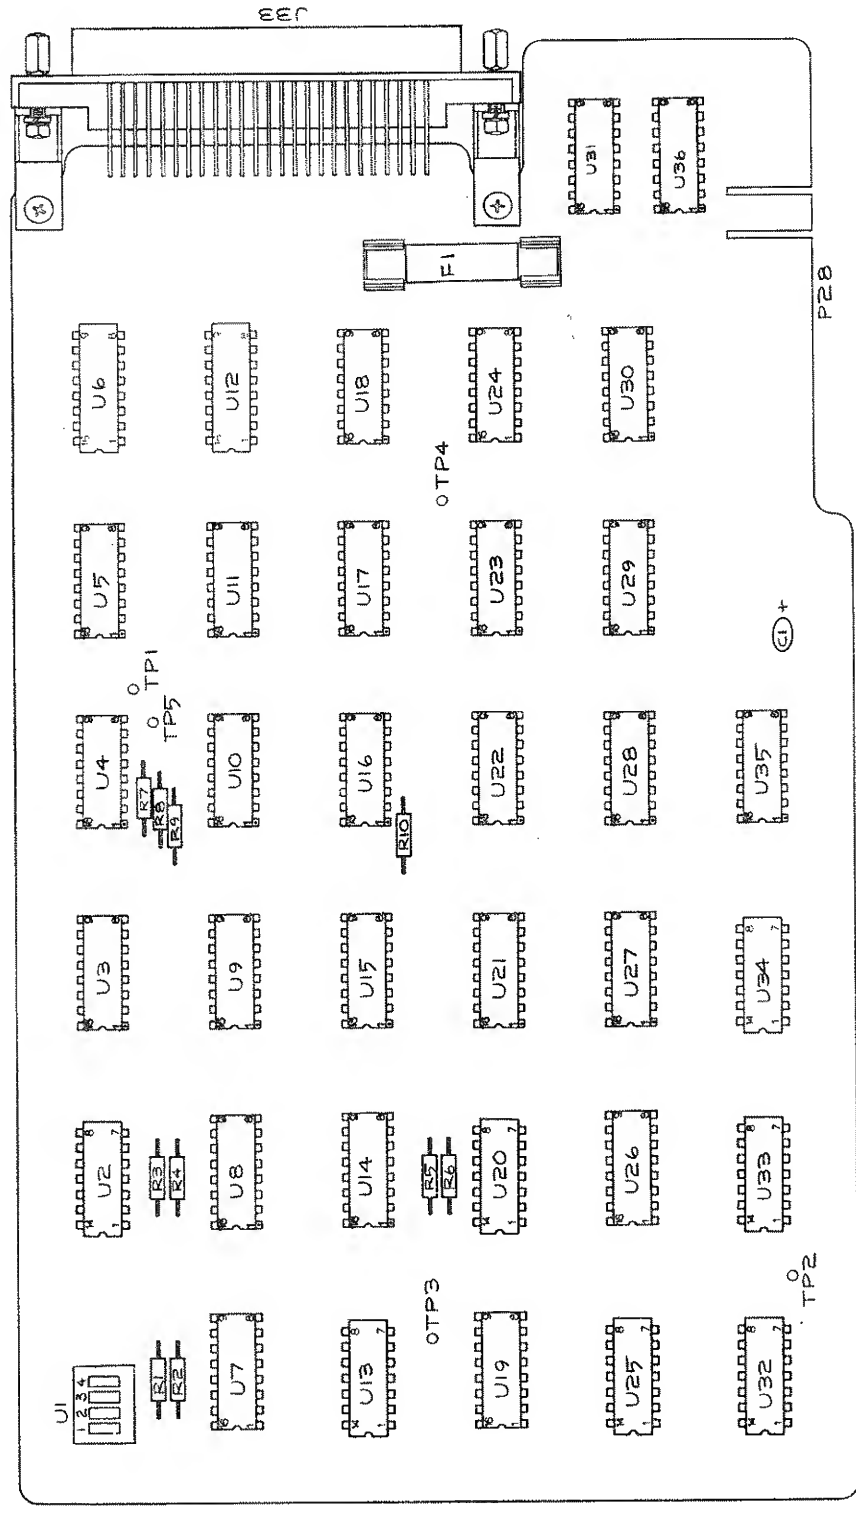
IEEE Interface PCB Assembly, Option -15
